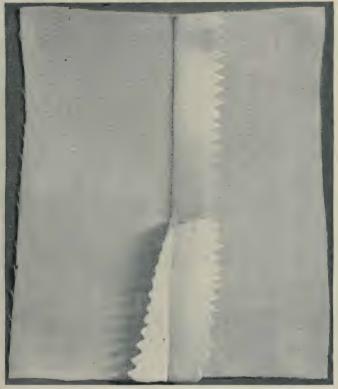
Cloth seam, stitched, pinked and pressed together or open.
